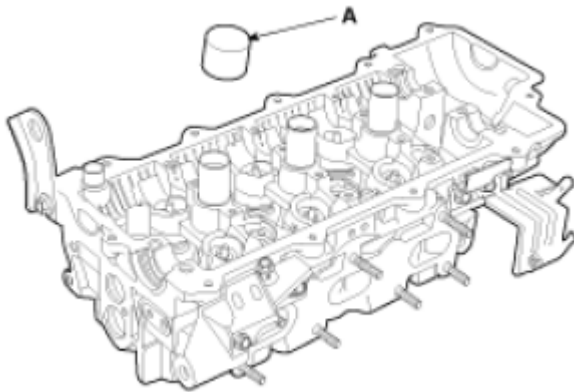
Identifying MLA (Mechanical Lash Adjuster)
